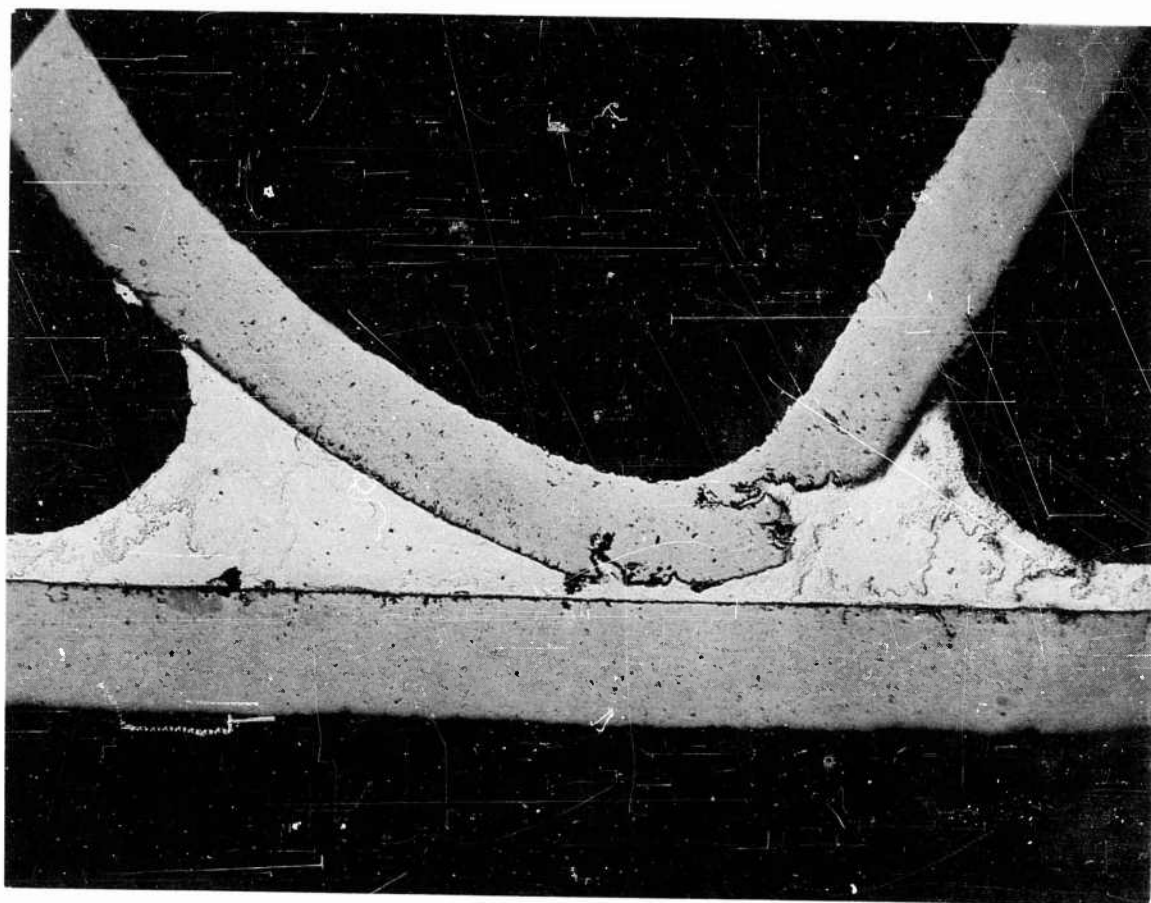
Beryllium Cross-Rolled Sheet to Beryllium Cross-Rolled Sheet Joint in a Truss-Core Sandwich Furnace-Brazed Specimen, Using 50 Ag-15.5 Cu-15.5 Zn-16.0 Cd-3.0 Ni Brazing Alloy. Magnified 60X, Unetched
